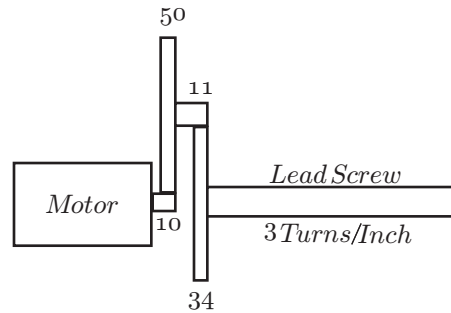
Rear gearing to increase motor torque (numbers shown are number of gear teeth)
